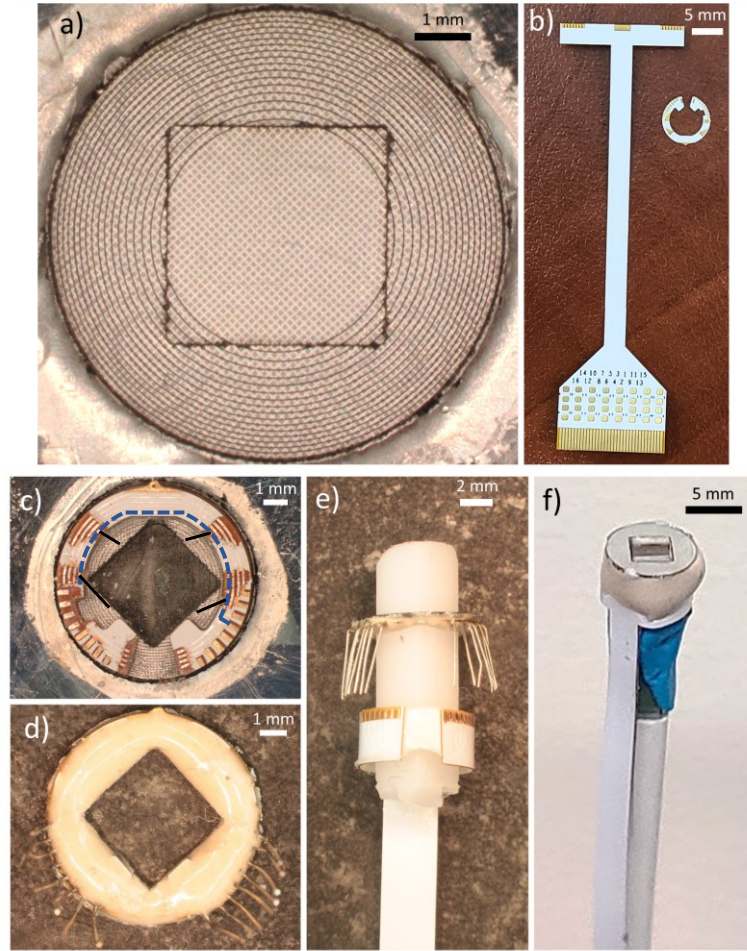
Fabrication of the forward-looking annular array. (a) Piezoelectric composite with array outline laser diced and elements etched. (b) Two interposer PCBs used to route array elements to cable bundle. (c) Array with interposer PCB bonded to back, with wirebonds used to connect array elements to traces. (d) Array after soldering wires to pads and applying backing epoxy. (e) Array stack and PCB before soldering wires to pads. (f) Finished array with imaging probe attached.
